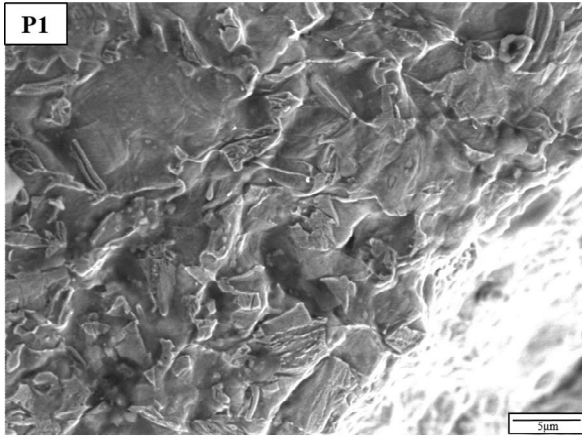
4 Fracture surface after in-situ fracture test.
